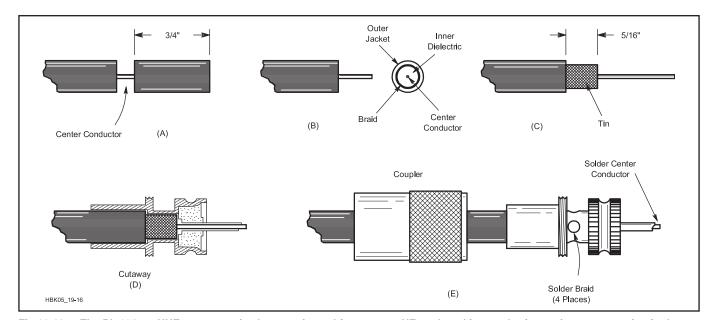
The PL-259, or UHF, connector is almost universal for amateur HF work and is popular for equipment operating in the VHF range. Steps A through E are described in detail in the text.
